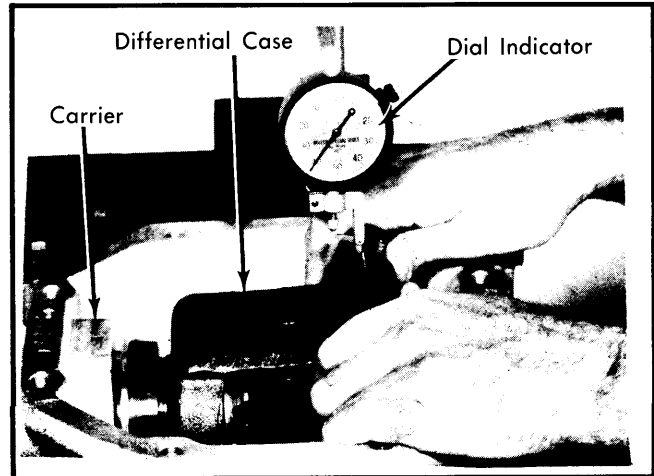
Differential Side Play Measurement. Make Measurement At Ring Gear Flange To Obtain Total Thickness of Shim Pack.
